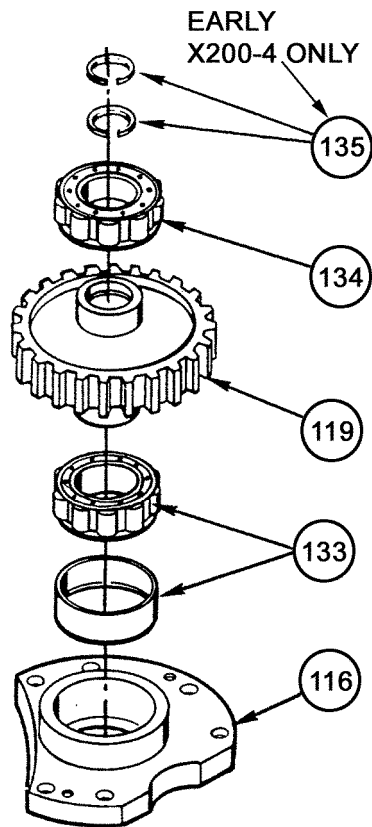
Hydrostatic Pump Idler Gear and Bearing Retaining Plate.
